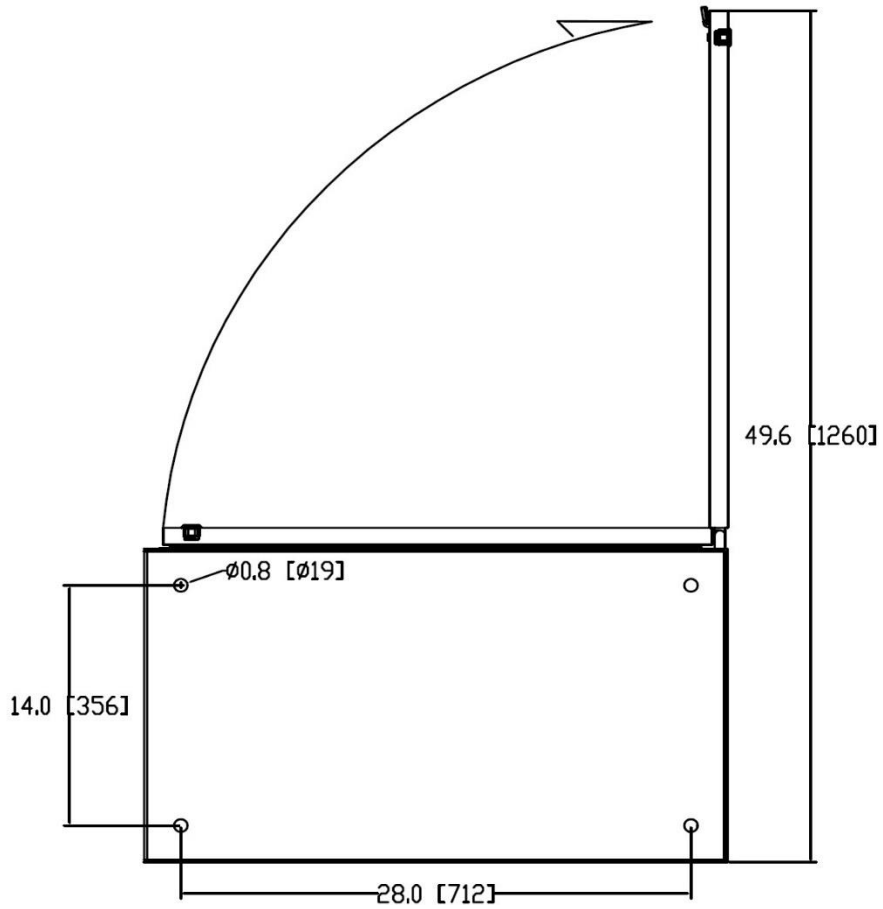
Bottom Dimensions, Customer I/O Panel (Enclosed)
